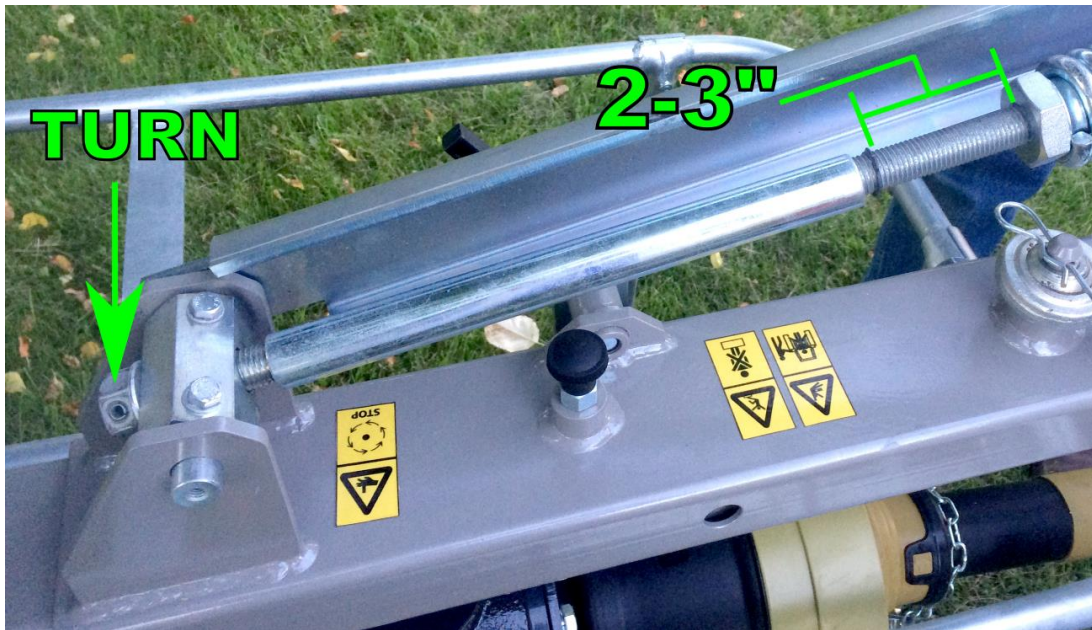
stretch the spring by turning the nut at the end of the threaded rod until the space indicated above is 2-3”
